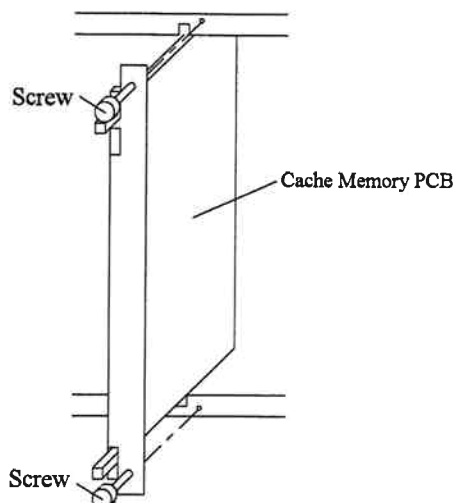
Removal of the Cache Memory PCB
